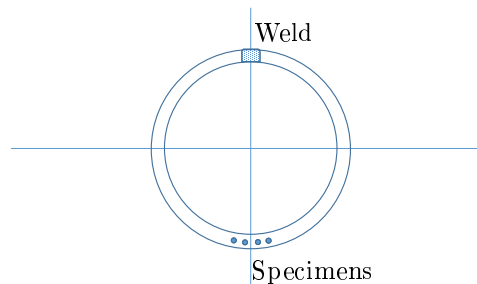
Cross-section of offshore pipe. Specimens taken from the side opposite to the weld.
